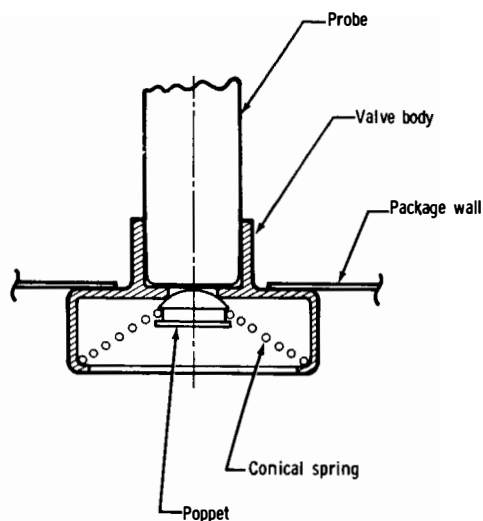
Conical-spring-loaded poppet-valve aperture.
